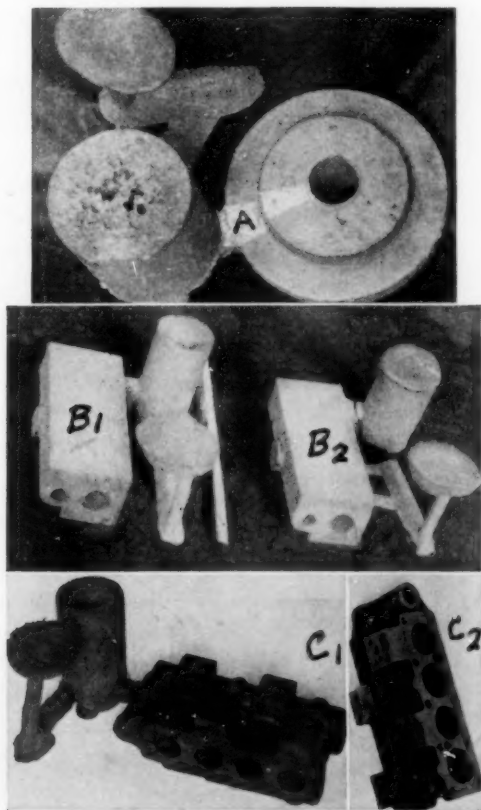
(A) CASTING SECTION WHICH SOLIDIFIES LAST. (B1) NEW AND (B2) OLD METHODS OF GATING. (C) GATING CASTING WITH VARIOUS SECTIONS.
